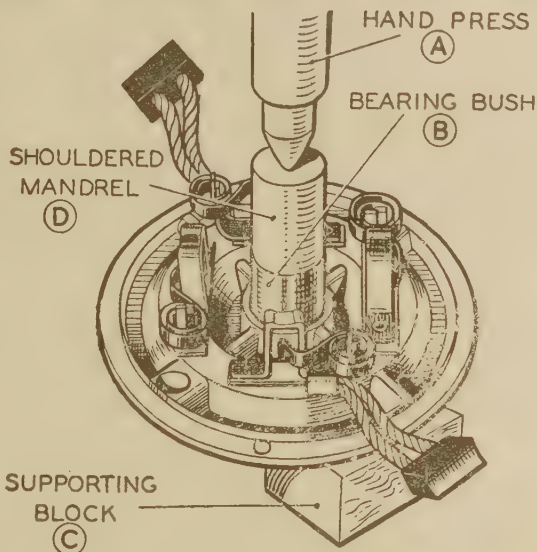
Fitting a New Brush in the Starting Motor End Cover (Morris).
